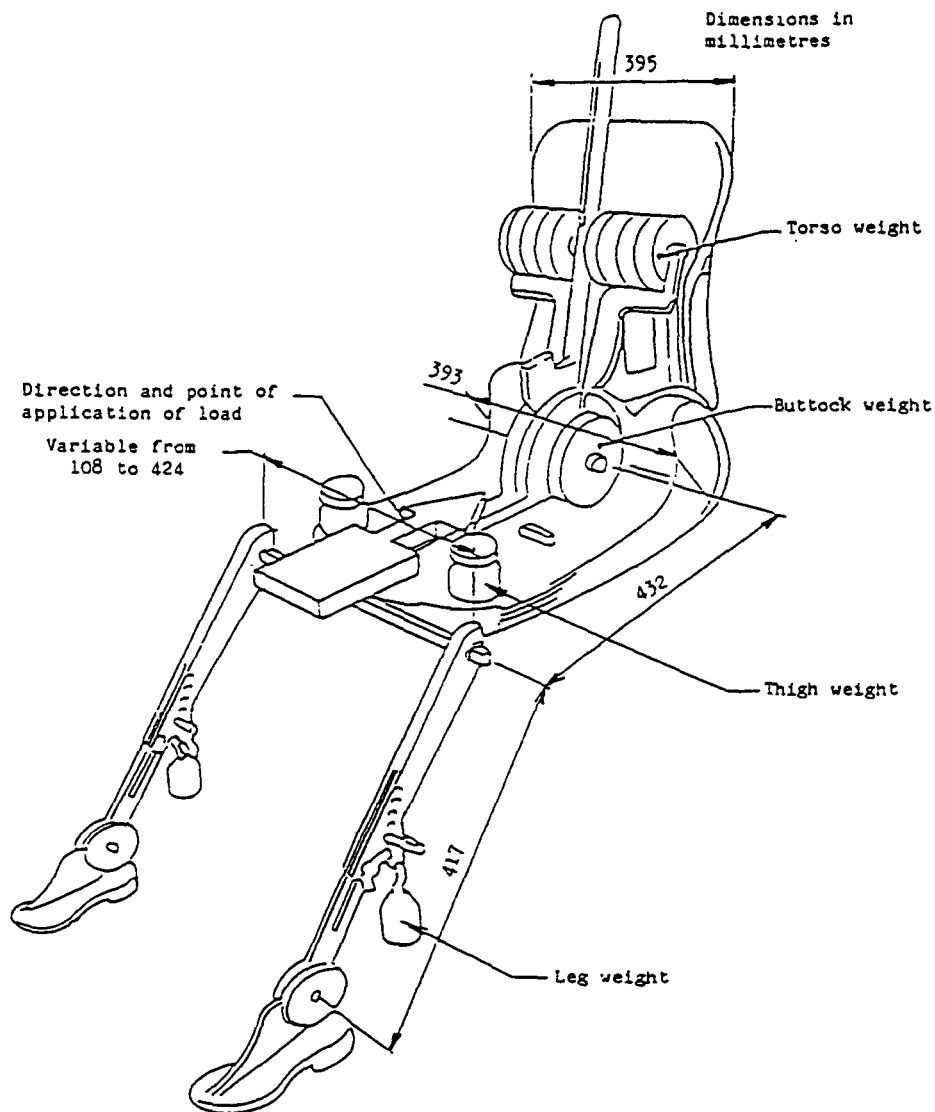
Dimensions of the 3-D H machine elements and load distribution
